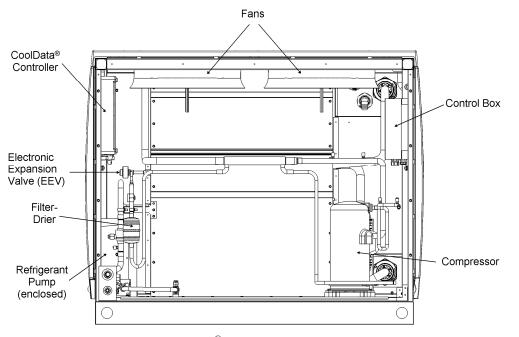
Ice Bear[®] 30 Unit Internal Components (Front view, Condenser Coil not shown for clarity.)
